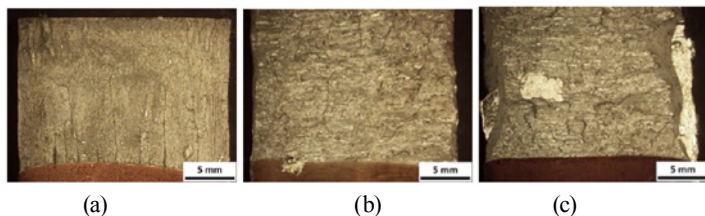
Macrographs of fracture surfaces of (a) BM, (b) WM and (c) HAZ [10]
